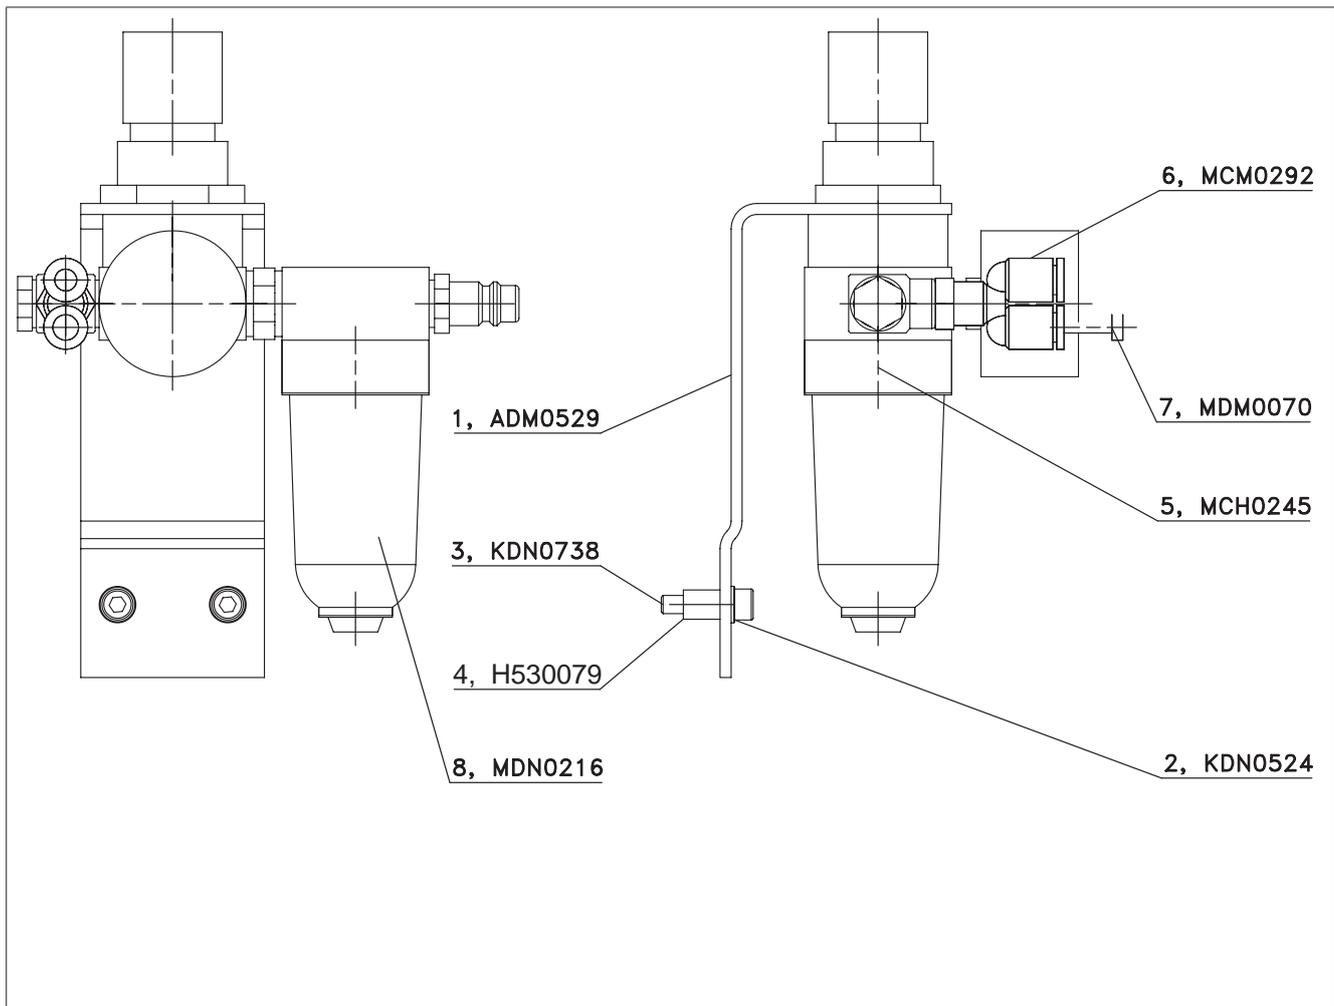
/7: Spare parts for basic unit, spray-air adapter kit
